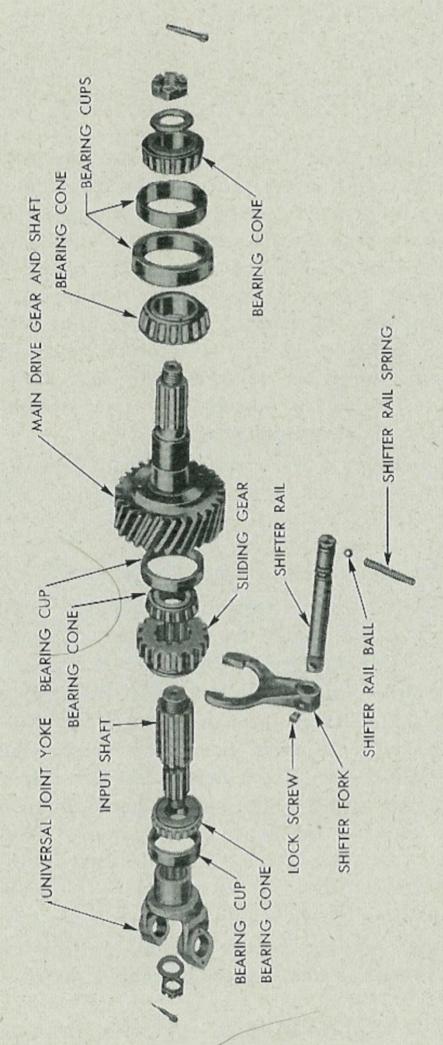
Input Shaft and Main Drive Gear Shaft, Disassembled
